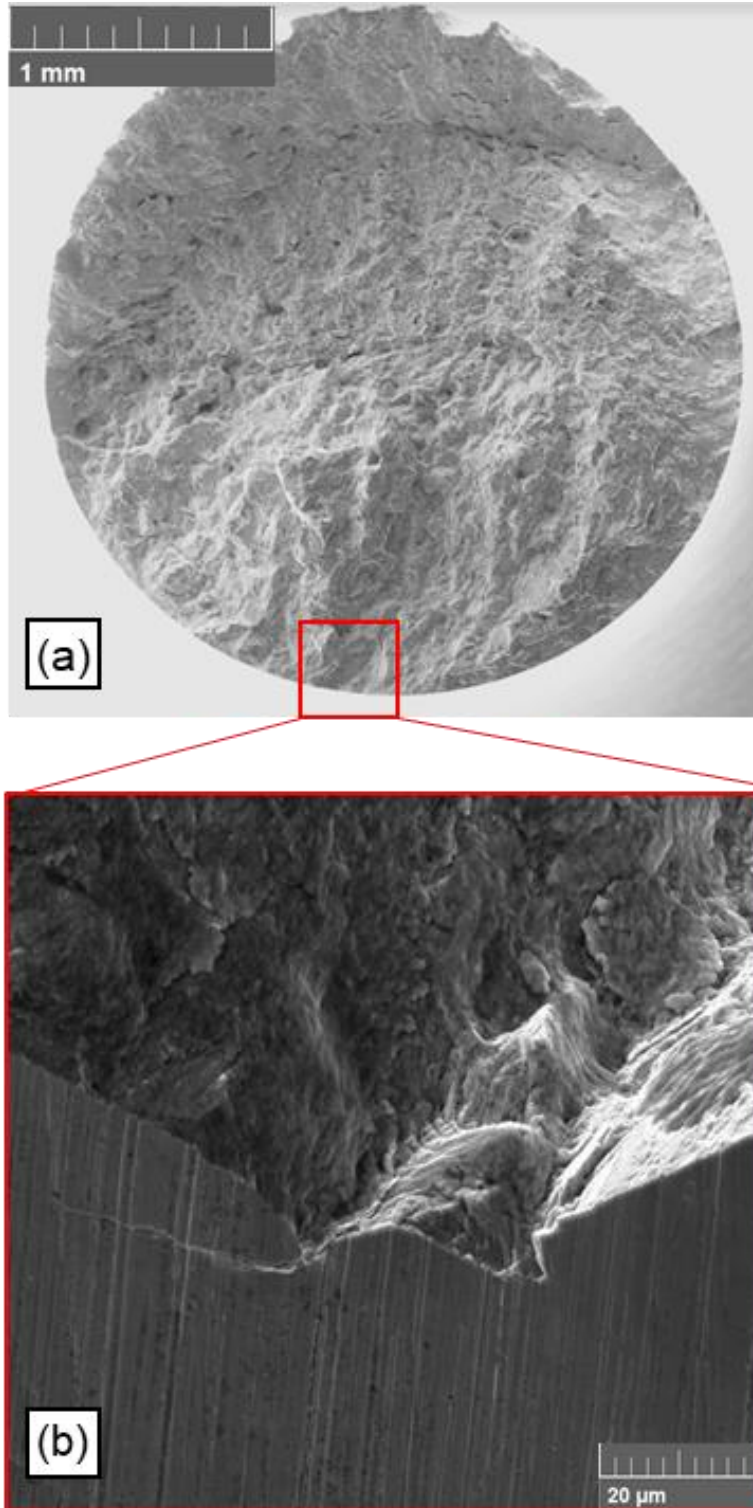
SE fracture surface images of a machined D LB-PBF Inconel 718 specimen tested at $\sigma_a = 700$ MPa with a corresponding fatigue life of $2N_f = 6.76 \times 10^5$ reversals. The specimen in (a) experienced surface crack initiation from multiple sites, such as (b).
